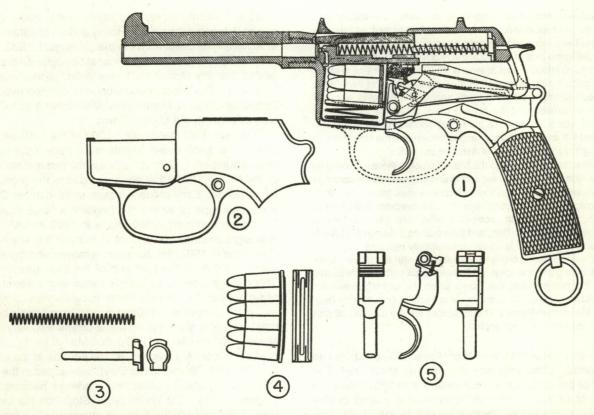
Section view of the Modell 1896 (I) Mannlicher pistol. 1. Note that the hammer is cocked in this drawing. 2. Side plate removed to expose interior of pistol. 3. Recoil spring and spring guide. 4. Loaded cartridge charger clip. 5. Views of the trigger. (Von Kromar/Smith)
